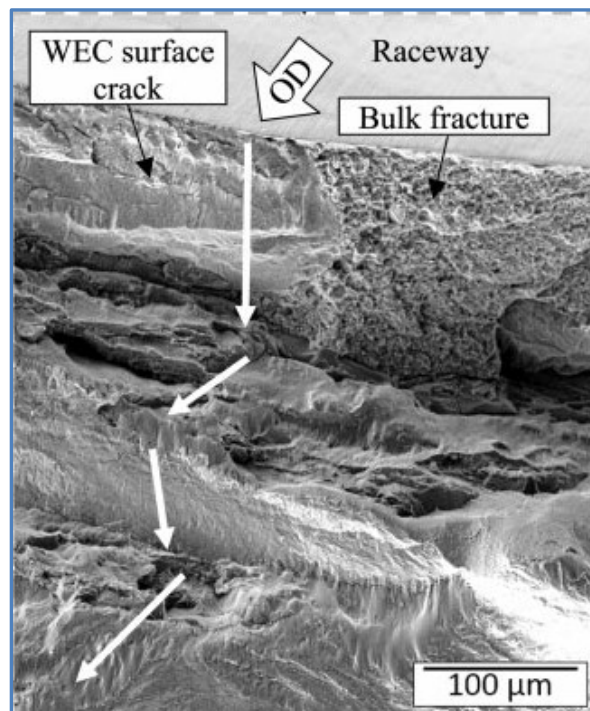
Fractograph analysis of a surface initiate crack [3]
